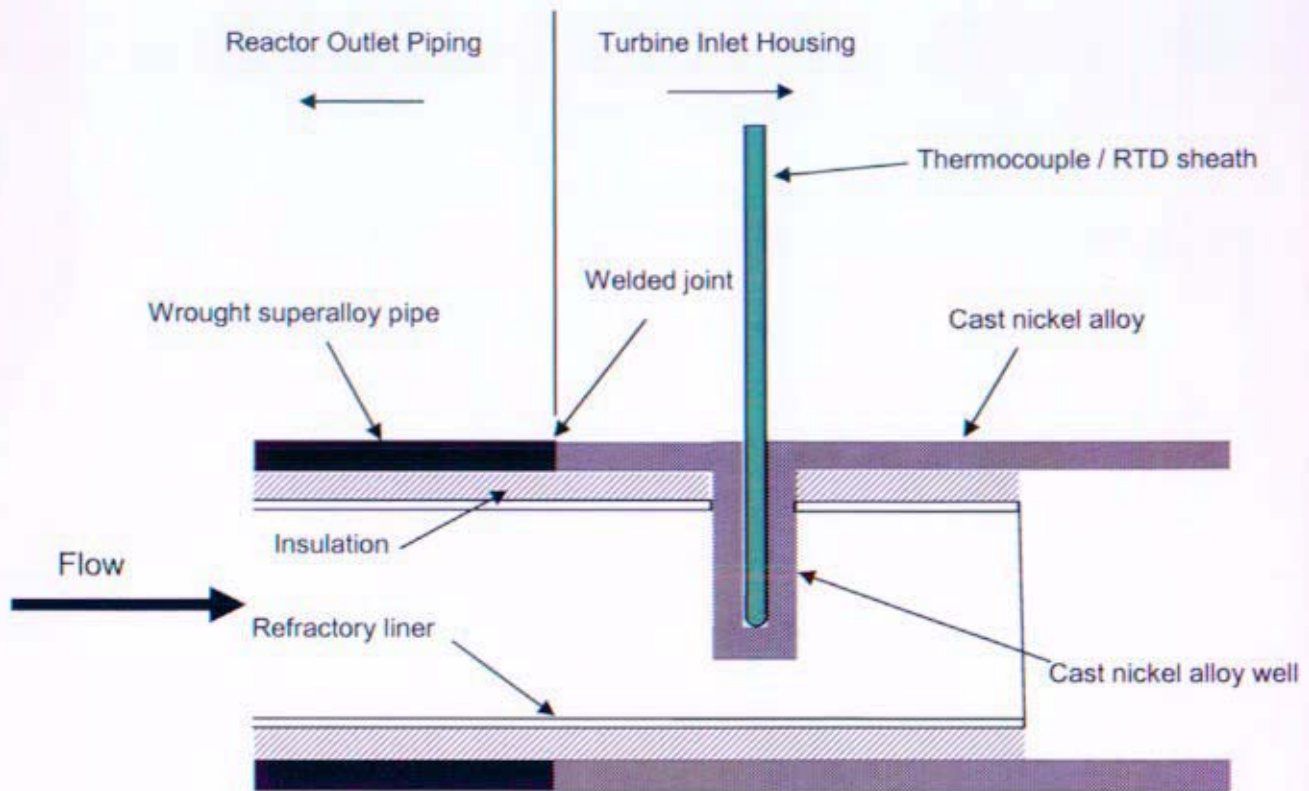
A cast turbine inlet dry well. The cast superalloy is assumed to be capable of high temperature performance. The pipe and housing weld is insulated from the high temperature coolant and located sufficiently far from this well to ensure the weld and the wrought piping material temperatures remain below 900K.
